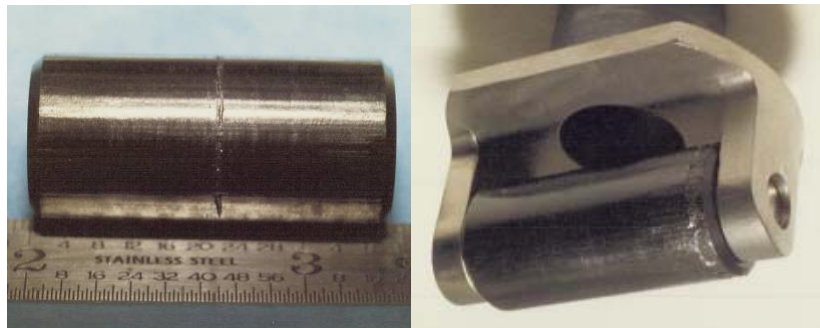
Roller locked in the detent groove when the valve is in the open position
